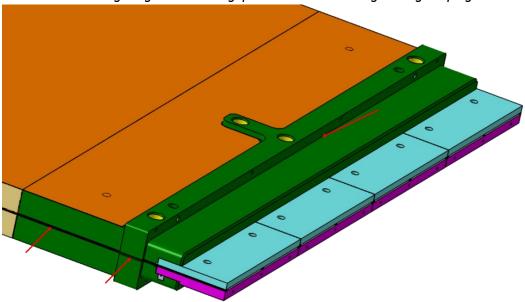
Inner edge of the sealing surface coldbox and gap between neighboring endplugs
